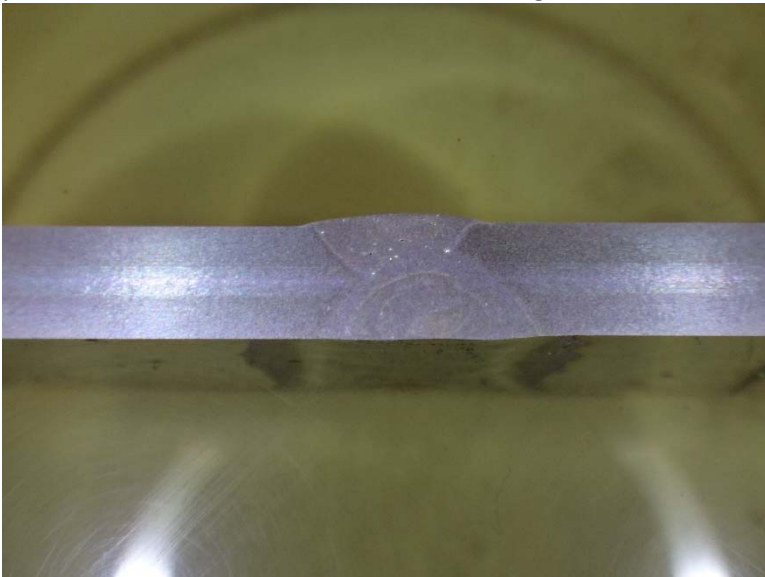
5052-H32 aluminum plate welded with ER4043 rod. Mirror polished then etched with the Caustic etching solution.
